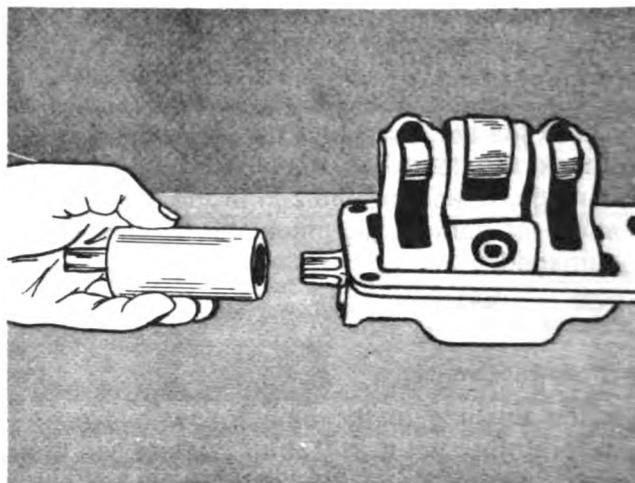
Use The 3376185 Tool To Adjust The Protrusion Of The Shaft.
